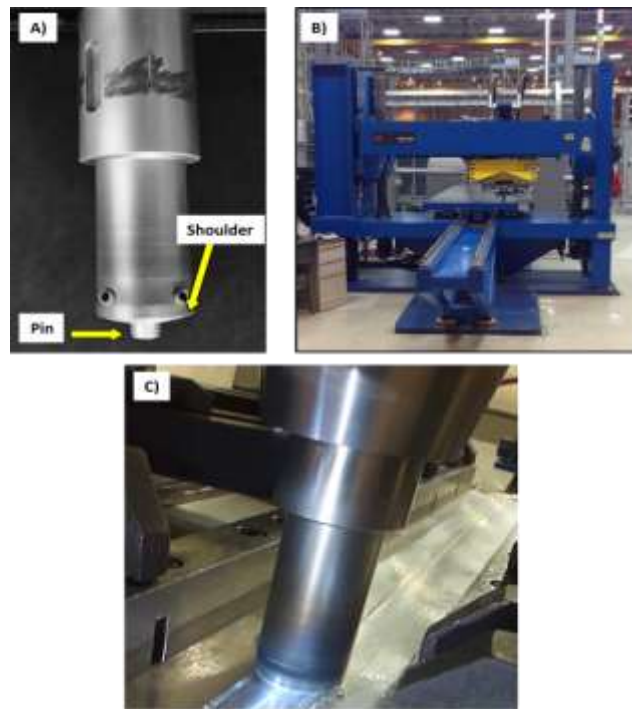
A) Fixed pin tool and B) I-Stir PDS machine employed in this study, and C) the FSW process during experimentation at the NASA Michoud Assembly Facility.
